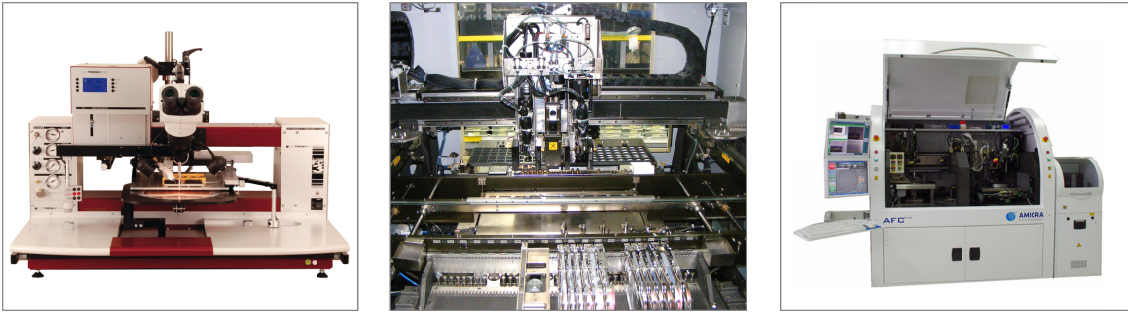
Semi-automated assembly machine (left), SMT placement machine (centre), and automated die-bonding machine (right) (AMICRA 2016; Tresky 2016; Wikipedia 2016)
